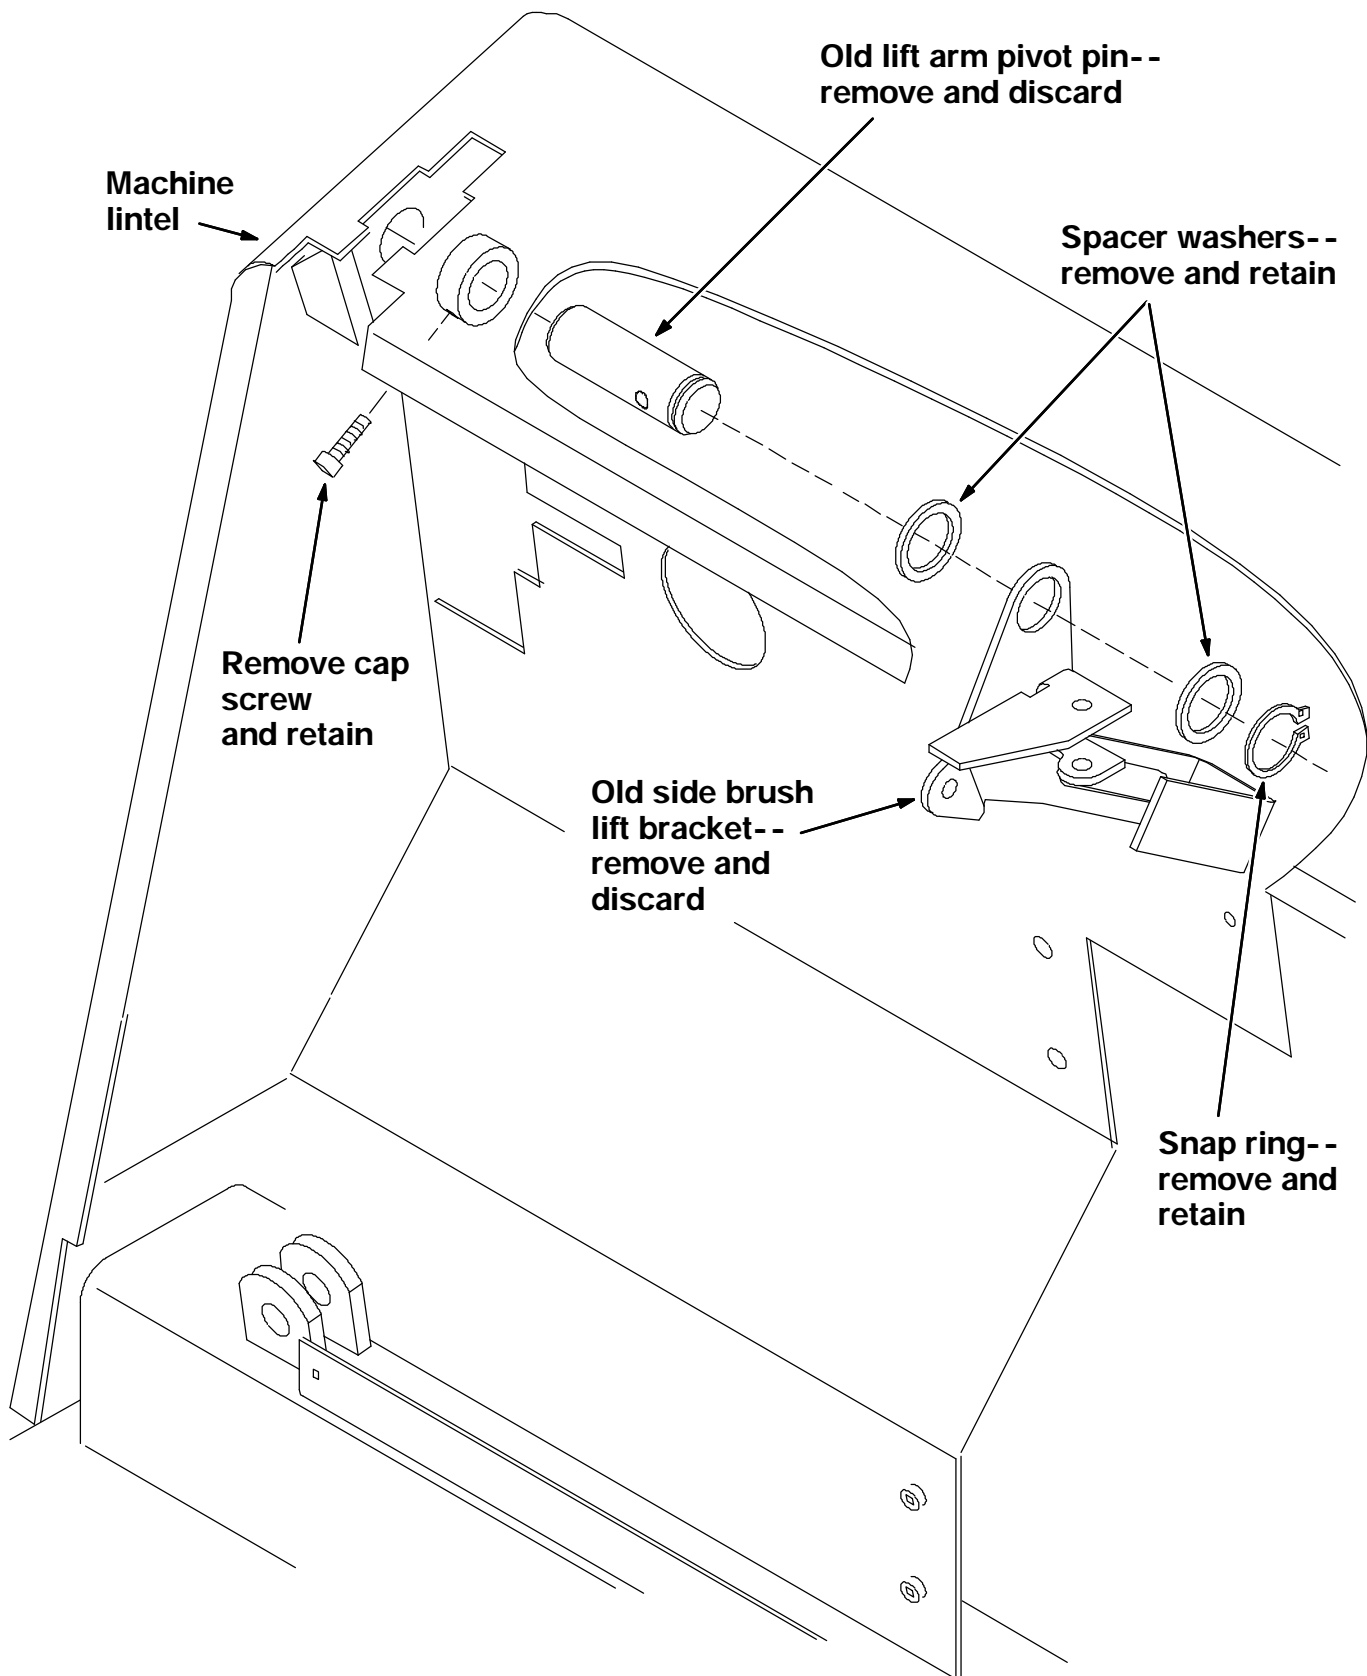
Old Style Side Brush Lift Bracket (remove and discard)
